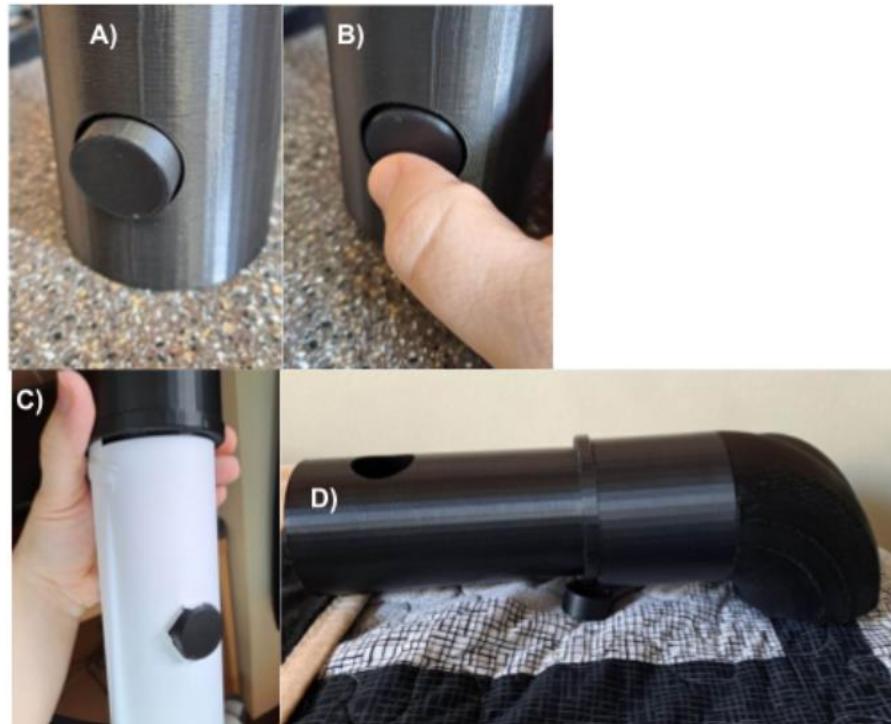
A) Connector Pipe Piece with button, B) button being pressed in, C) Connector Pipe Piece with paper as pipe, and D) Connector Pipe Piece and Connector Mid Section assembled
